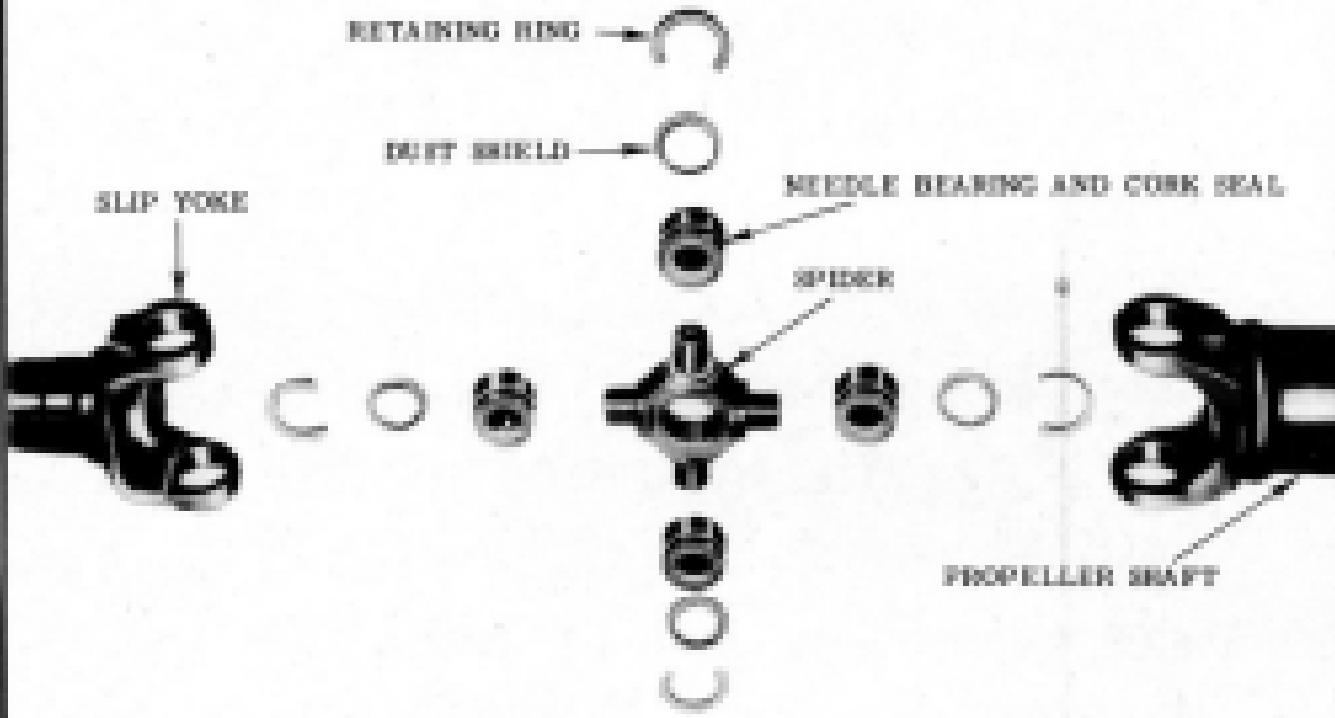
Universal Joint Details (Lock Ring Trunion Retainer Type)
